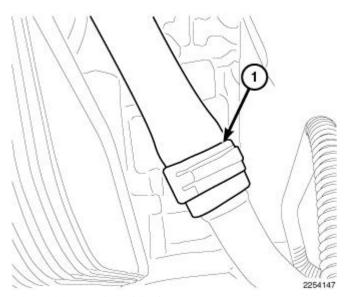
Engine Oil Coolant Hose Courtesy of CHRYSLER LLC
